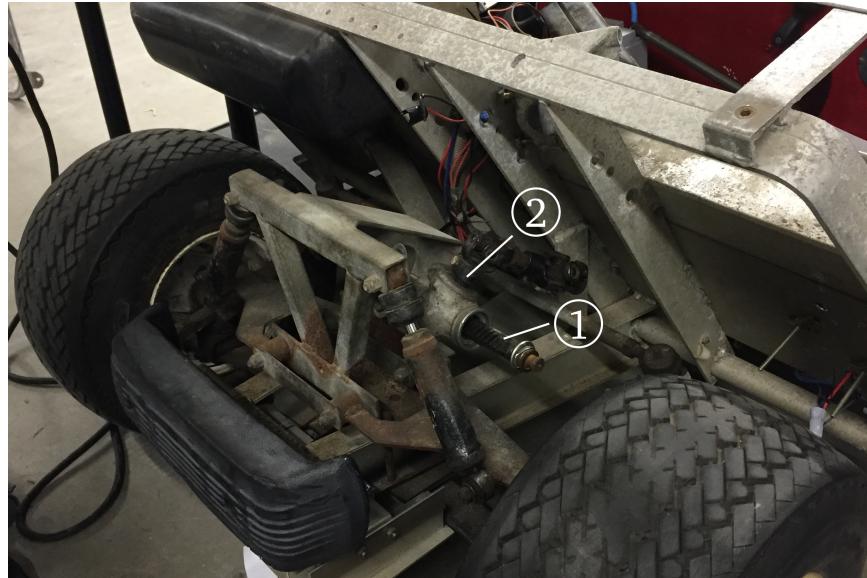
The rack and pinion steering mechanism in the golf cart.
